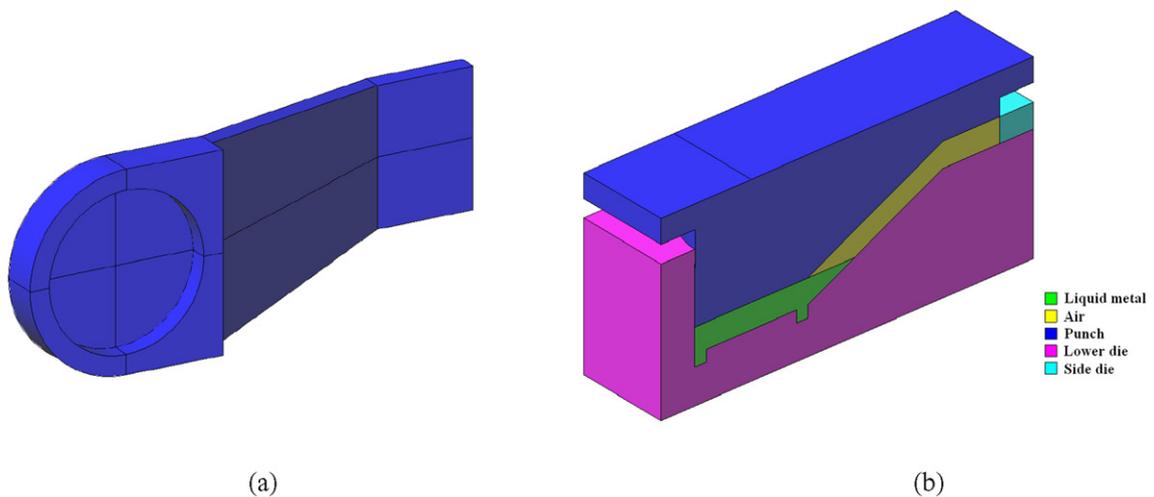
(a) Final casting geometry and (b) initial metal–dieset configuration.
